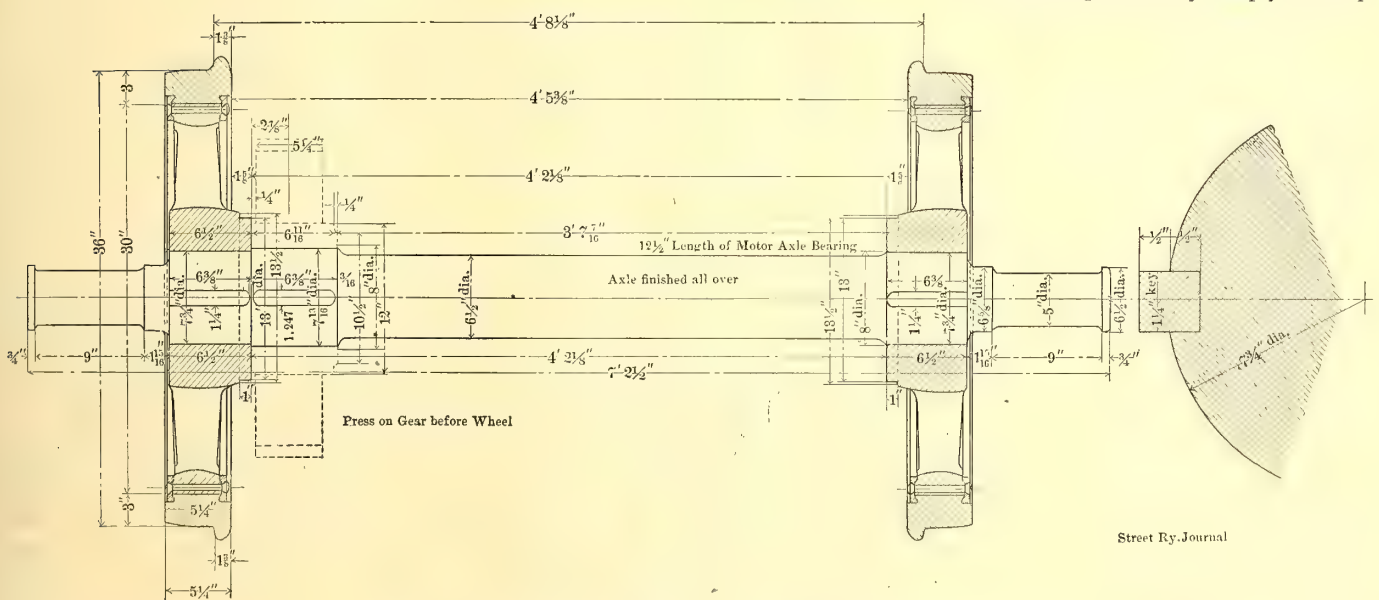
SECTION OF WHEELS AND AXLE ON MOTOR TRUCK
